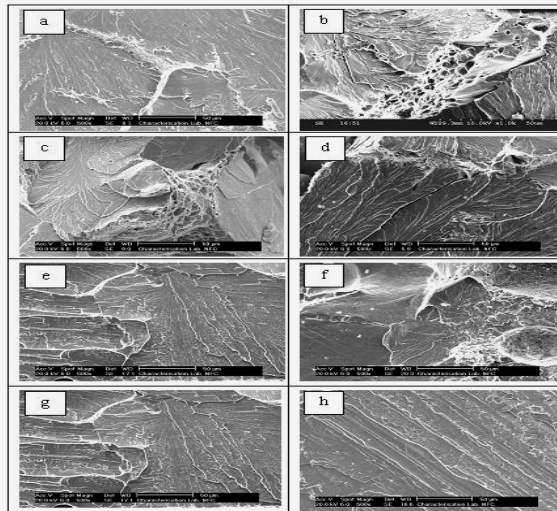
Fractographs of tensile (a, b, c, d) and impact specimens (e, f, g, h) of ferritic stainless steel weldments in post-weld annealed condition
